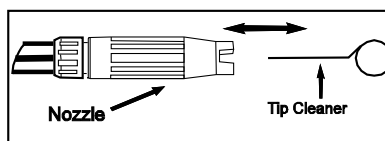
Insert tip cleaner in nozzle hole and move back and forth until debris is dislodged
